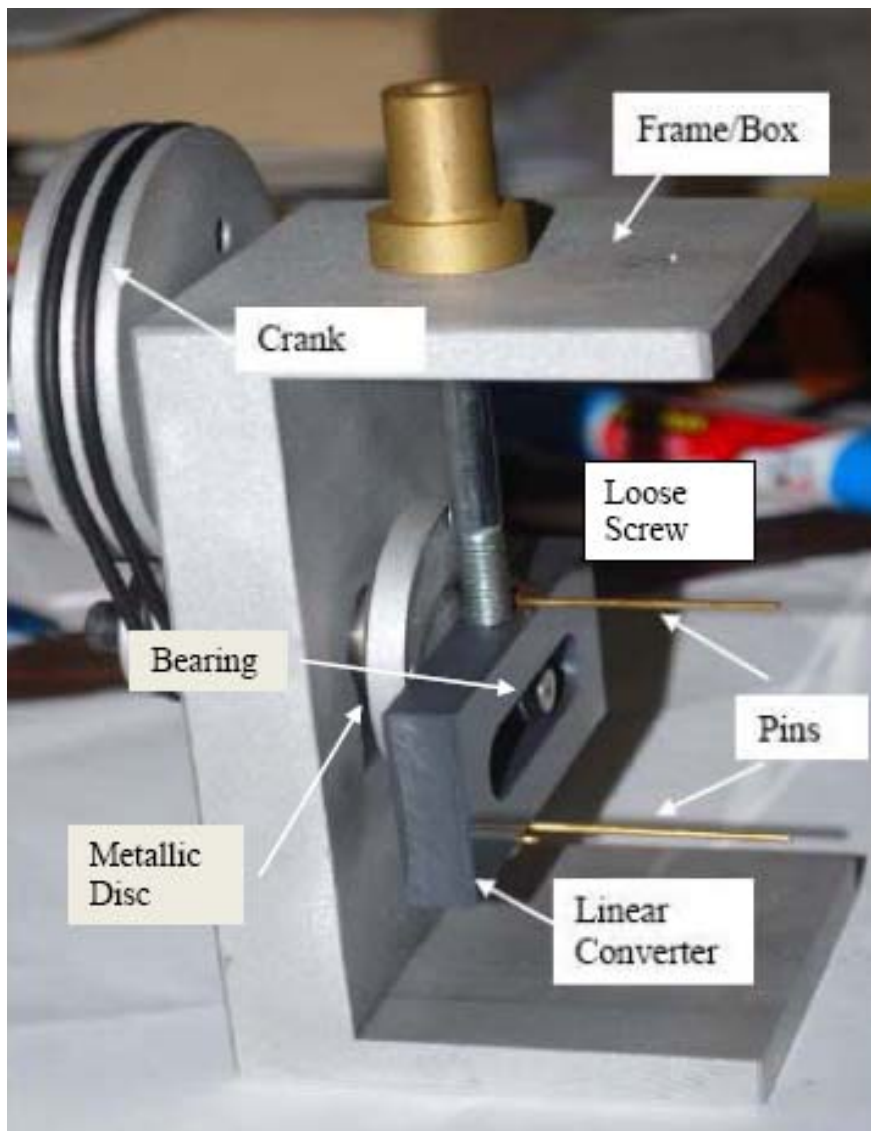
Frame with Cranking Device and Linear Motion Converter (a type of Cam system)
